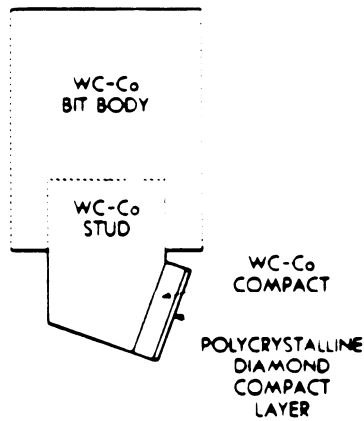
Mounting of PDC onto a cemented tungsten carbide stud.
